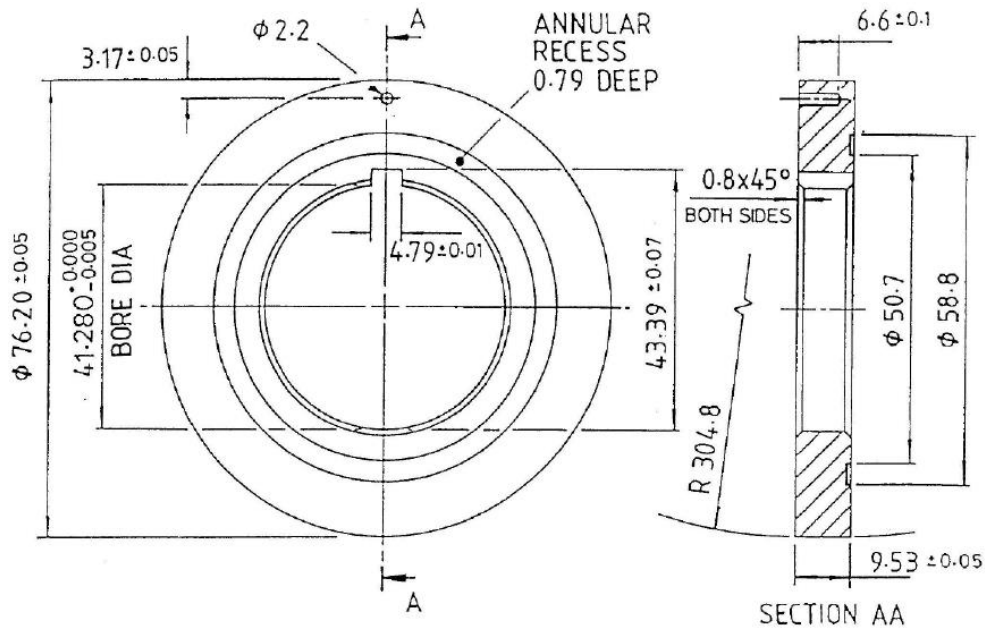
Drawing of a test disk used for experiments discussed in this work (all dimensions in mm)
